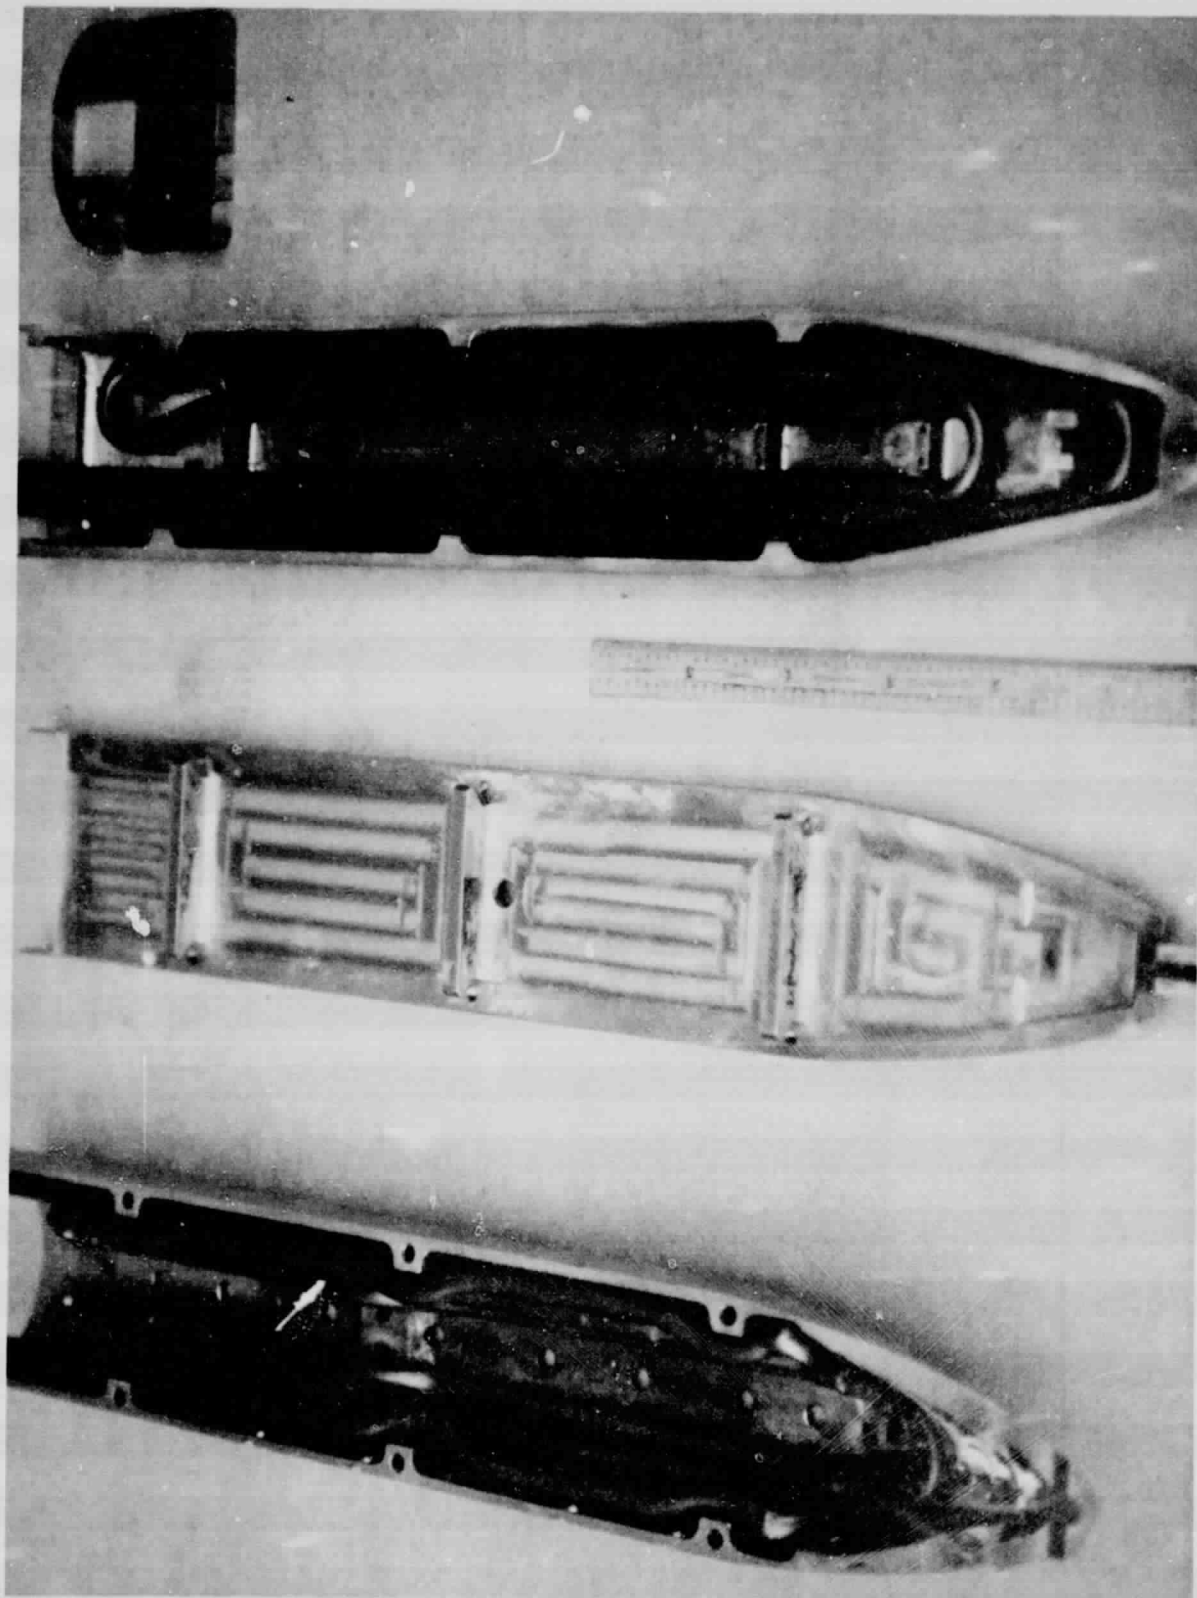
Photograph of the fuselage only configuration disassembled to illustrate the windward section, leeward section, insulation sheet, and cooling coils.
